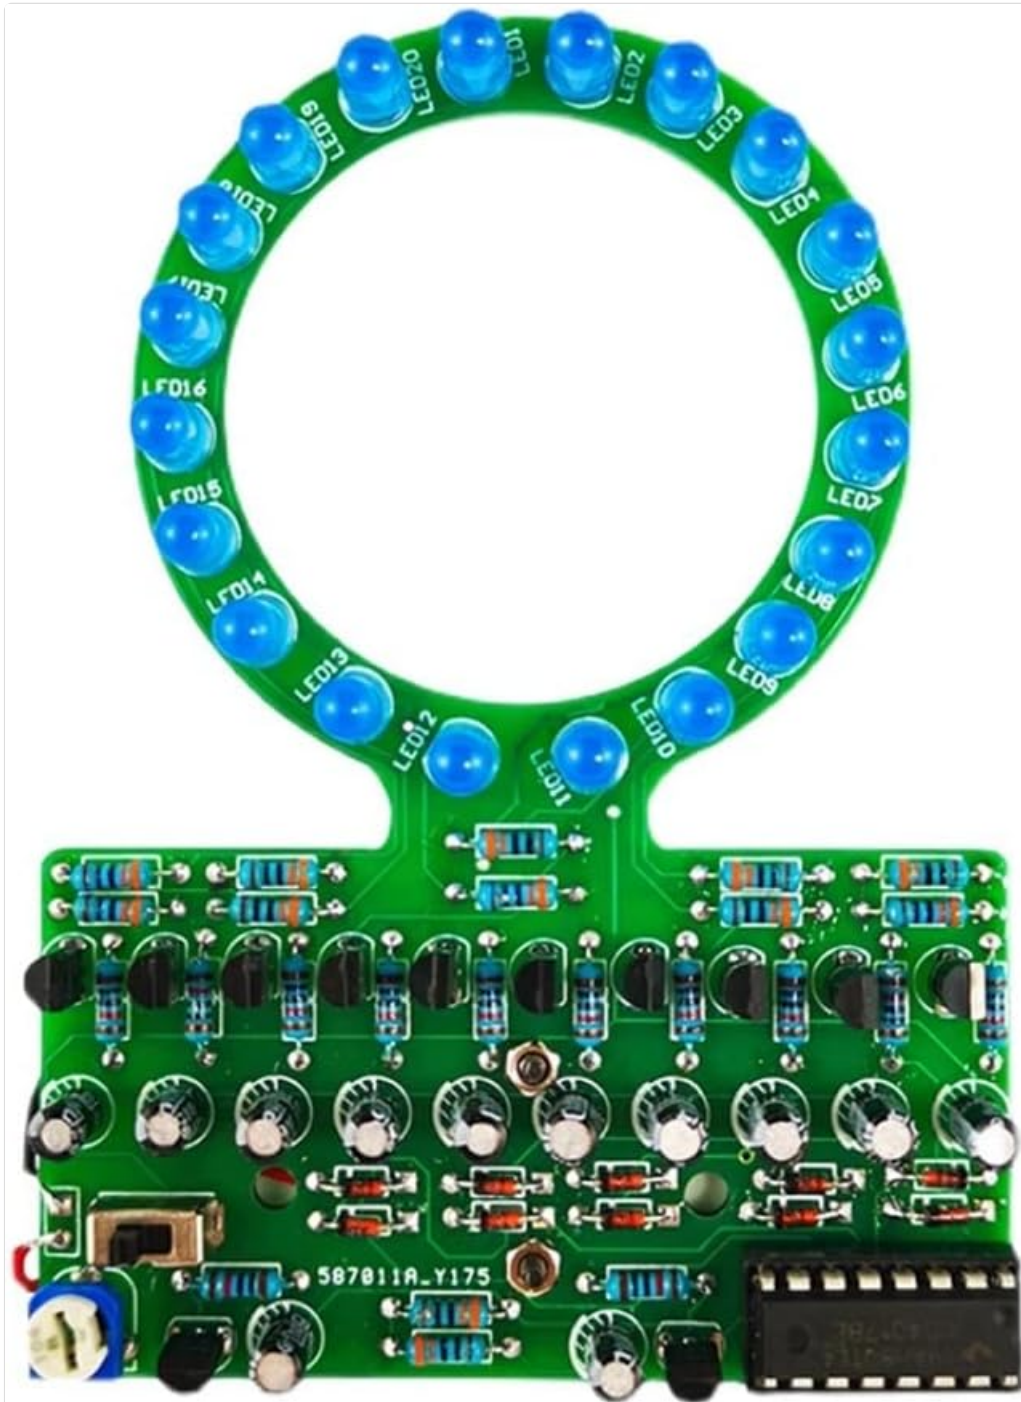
A view of the fully assembled circuit board, showcasing the soldered components and the circular arrangement of blue LEDs.
